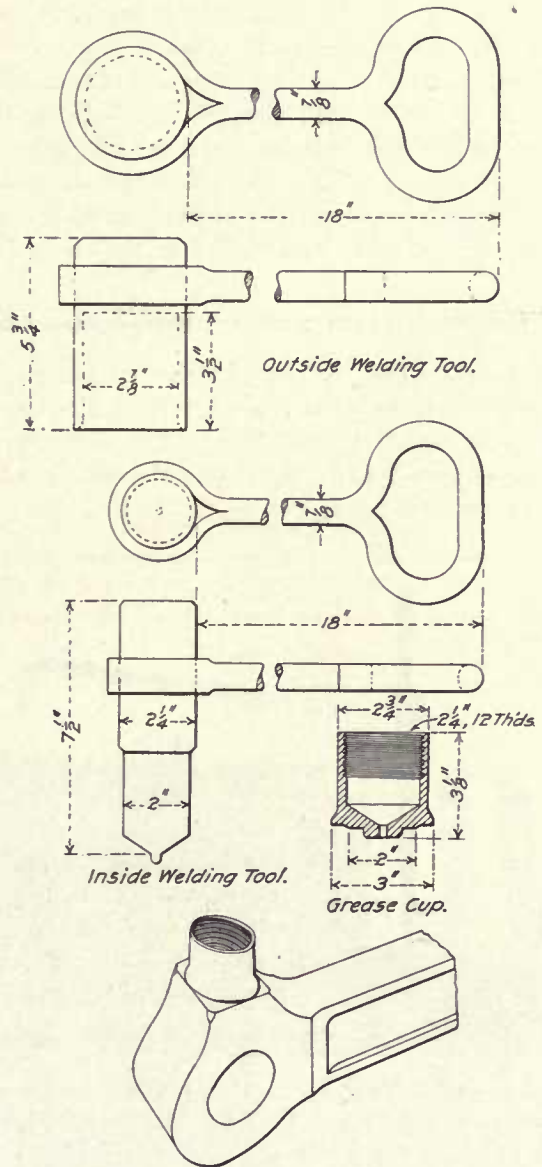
Grease Cup and Tools for Welding It to Connecting Rod.
